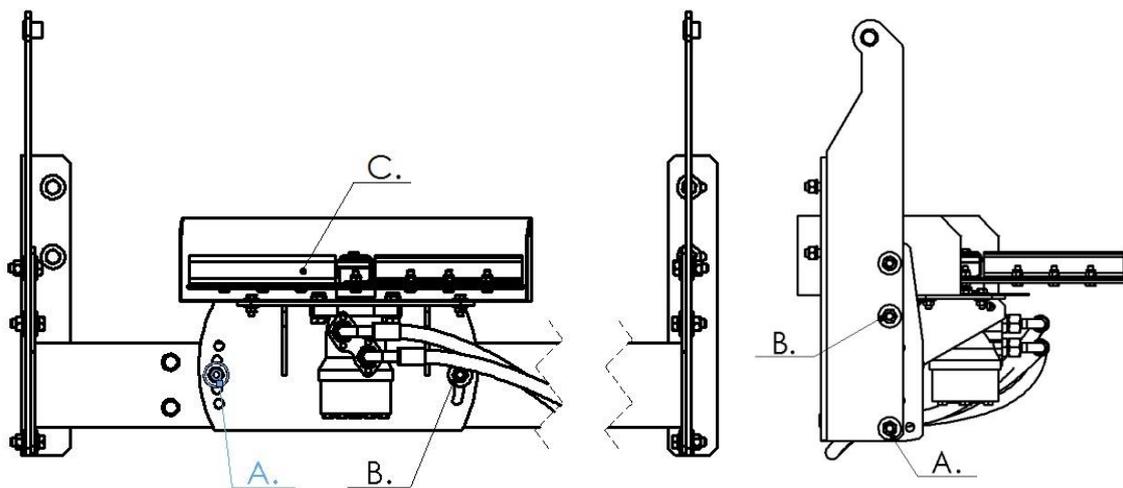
A. Screws to be unfastened and inserted into the desired hole.
